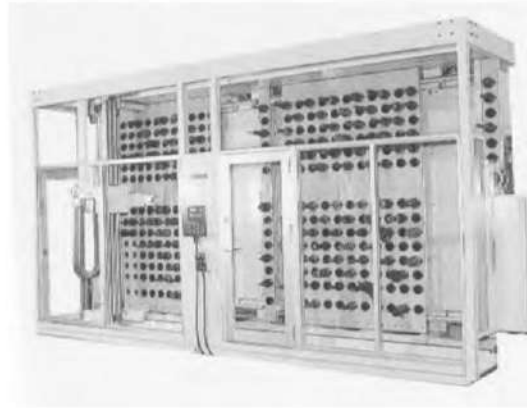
Secondary tool storage (tools hive) for FMS (Courtesy, Yamazaki Mazak Corp., Japan)
